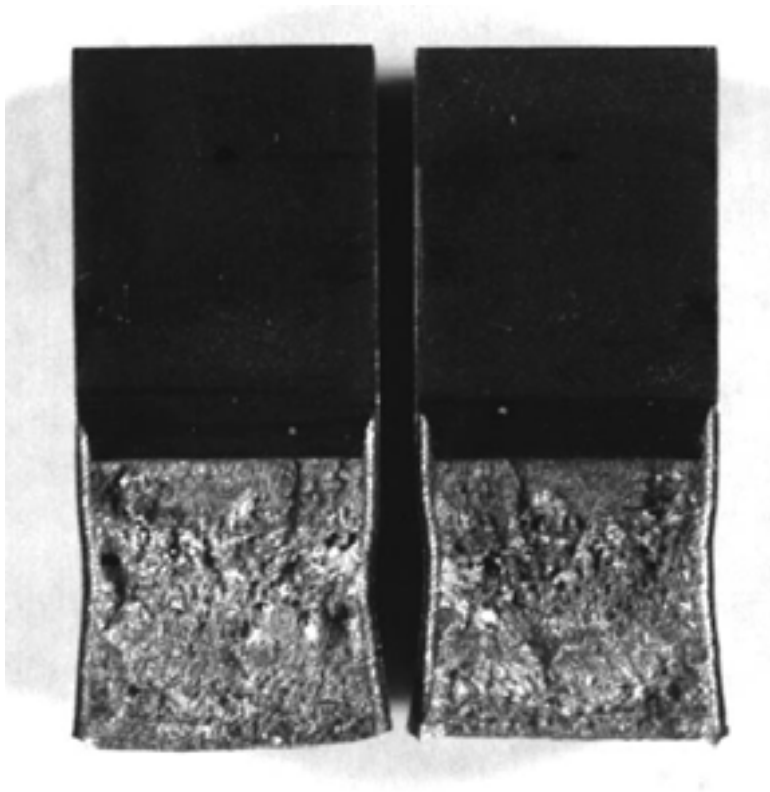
Fracture surface of specimen Y4-02 tested at 288°C
